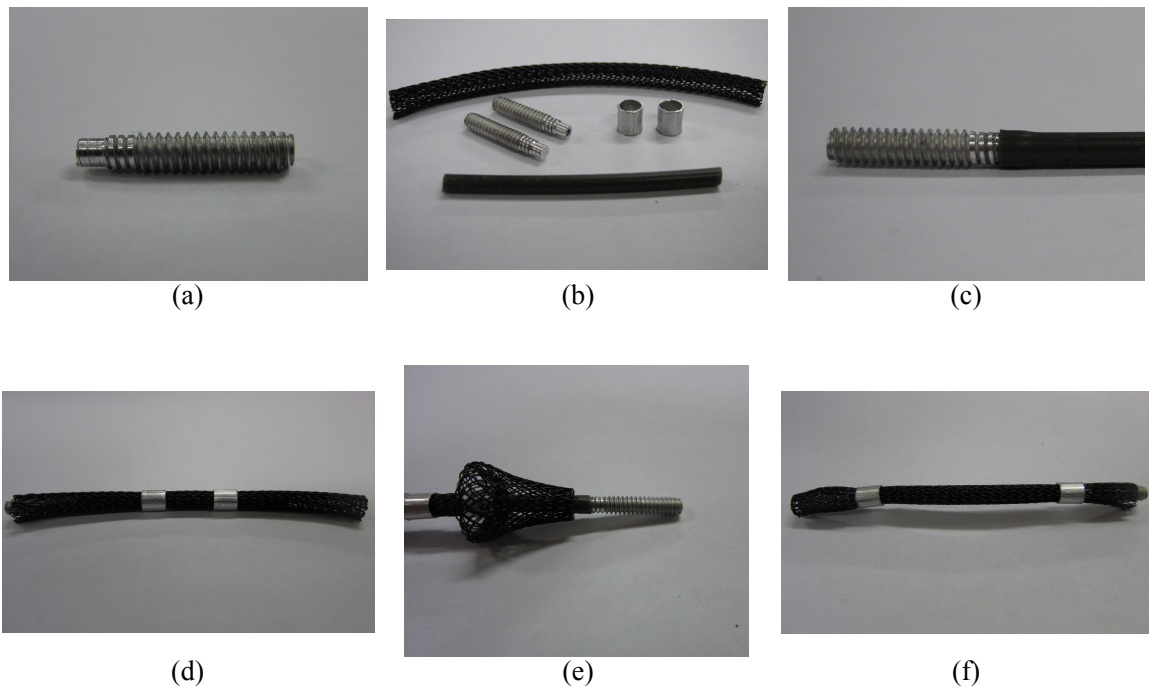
Steps in the fabrication process for small-scale PAMs. (a) Machine the end fittings with a step-down diameter scheme. (b) Prior to assembly, gather all materials and cut them to the appropriate size. (c) Attach the silicone tube to the smallest diameter portion of the end fitting. (d) Slide the braided sleeve and aluminum tubes over the silicone tubing before attaching the second end fitting. (e) Push the braided sleeve back when attaching the second end fitting to ensure epoxy does not get on the braid. (f) Slide the aluminum tubes over the end fitting/bladder/epoxy interface.
